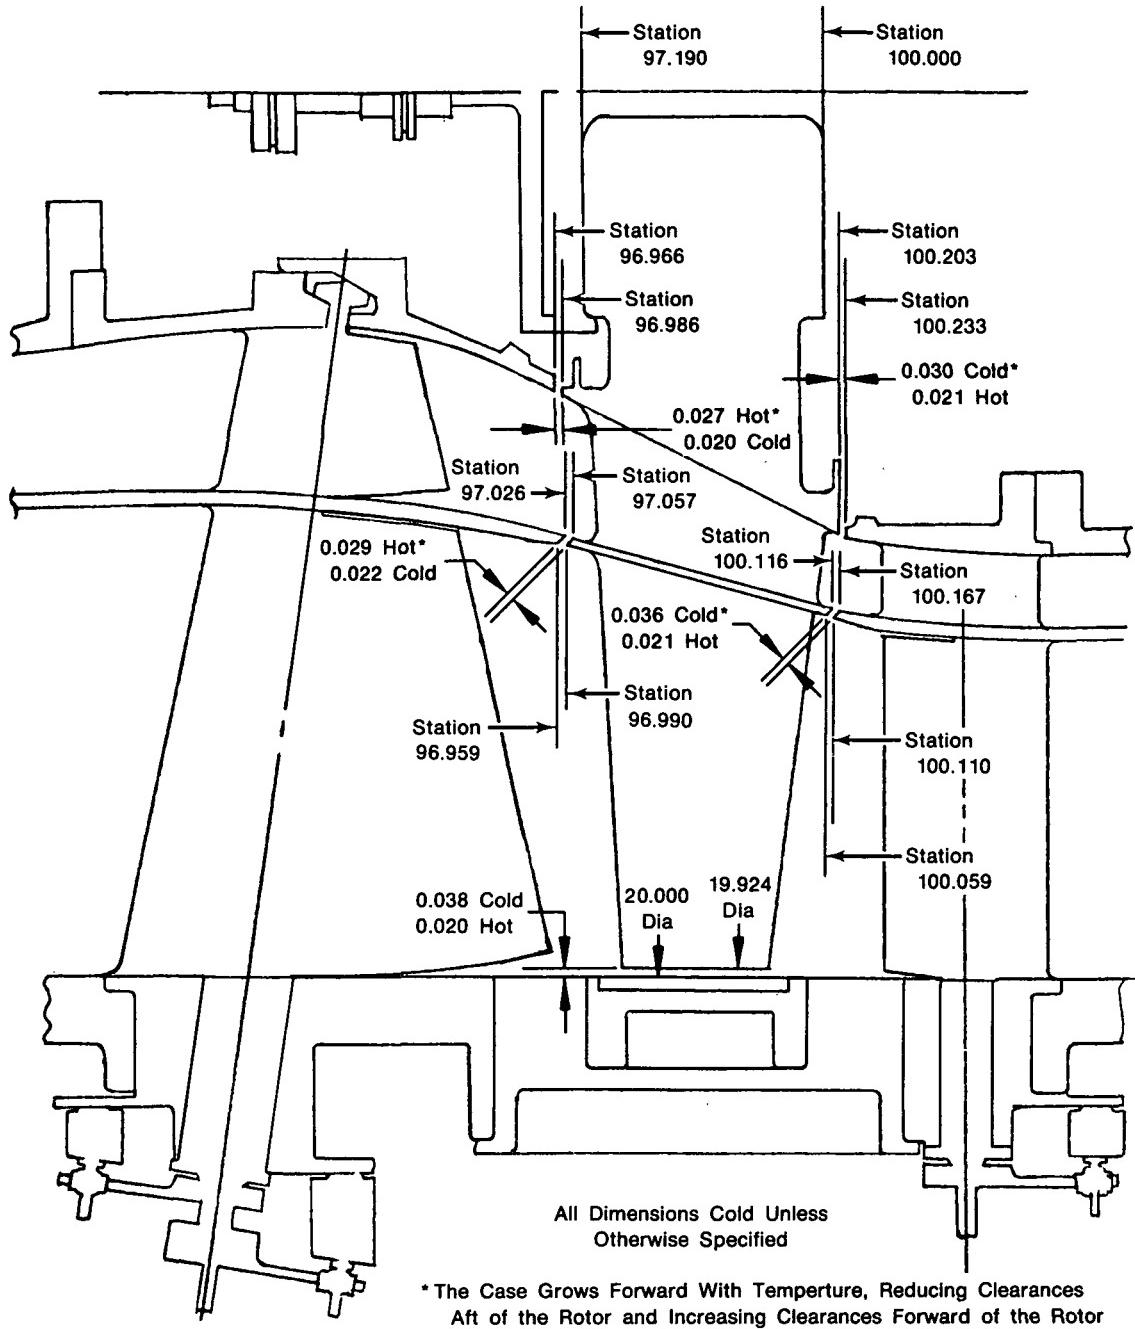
Critical Rotor Assembly Clearances (Minimum)
